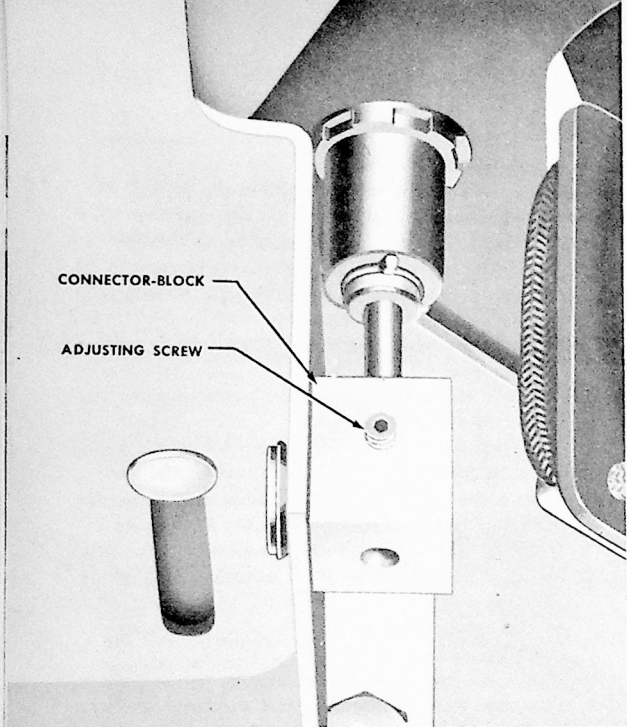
SPINDLE-HEIGHT ADJUSTMENT.
